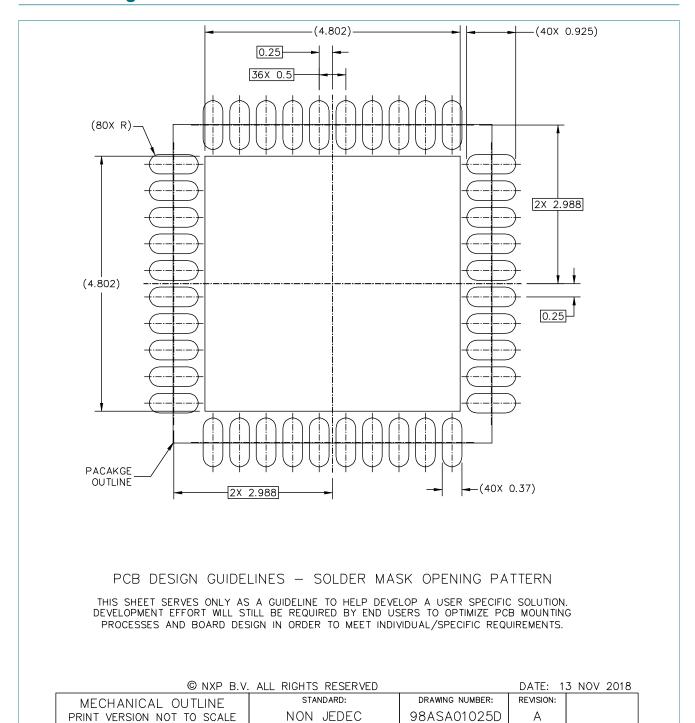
Reflow soldering footprint part1 for HVQFN40 (SOT618-13(DD))
